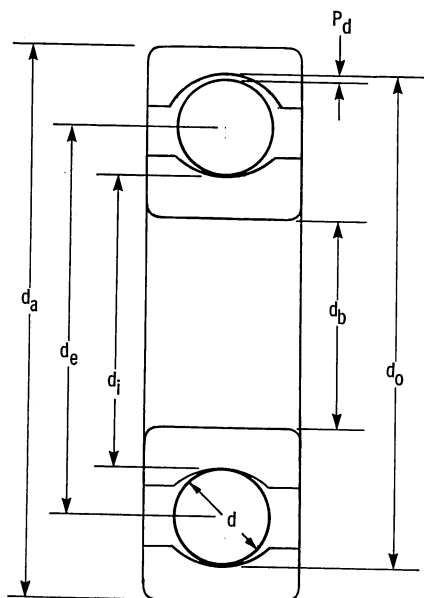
Cross section through radial, single-row ball bearing.
